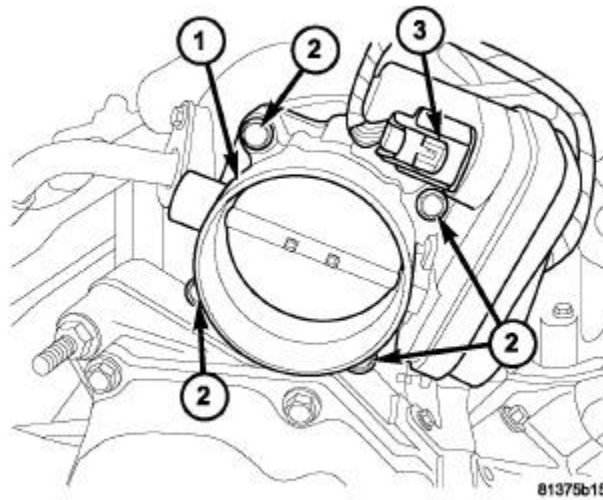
Throttle Body, Throttle Body Mounting Bolts & Electrical Connector
